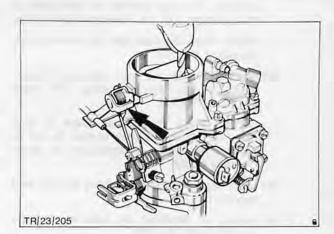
Choke mechanism held in closed position to check choke plate pull down. Adjusting tag marked
